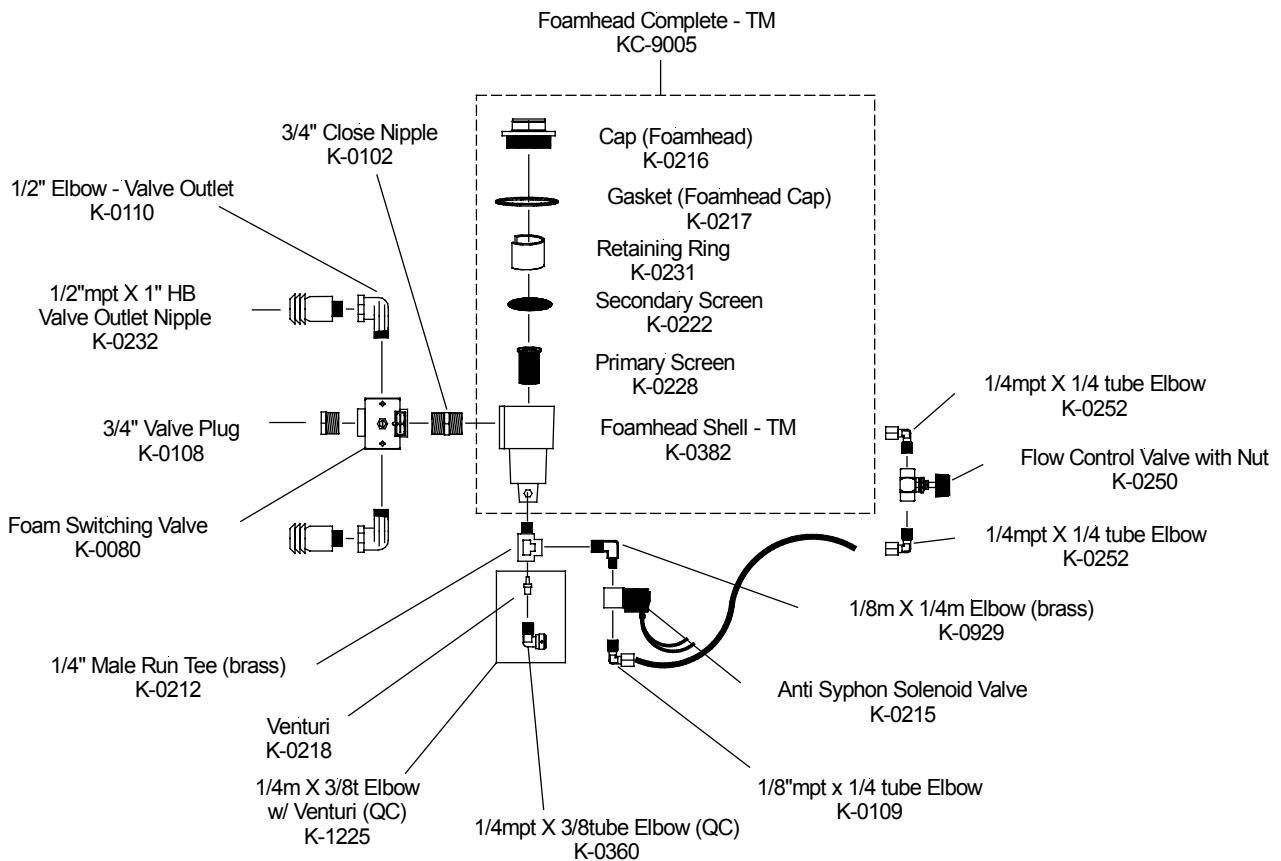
TRAC MASTER TMD Foamhead / Valve Assembly
